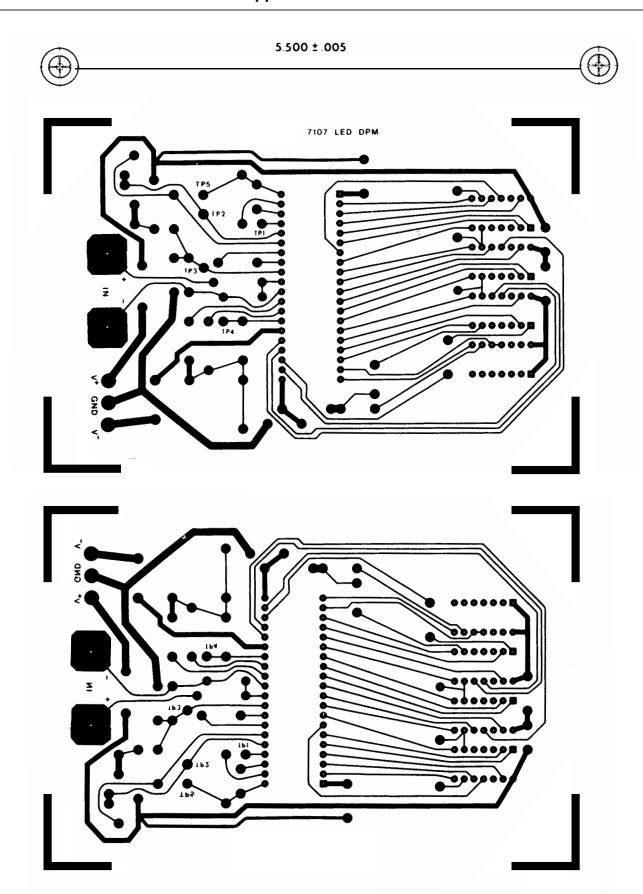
ICL7107 PRINTED CIRCUIT BOARD AND COMPONENT PLACEMENT
